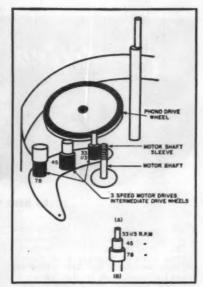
Motion of motor, through its shaft, is transmitted to speed-changing drive wheel, to inner rim of turntable. Three separate intermediate drives for the various speeds are shown in (A). Sometimes a single shaft with three stepped diameters is used for speed changes, as in (B).
